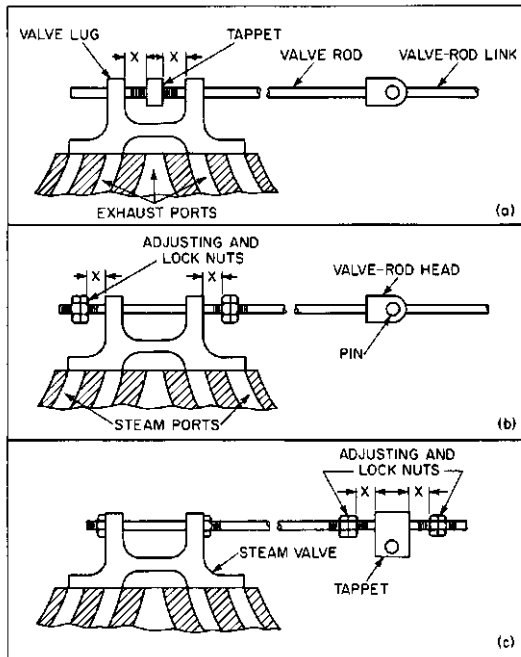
A through C Duplex pump steam valve lost-motion arrangements
